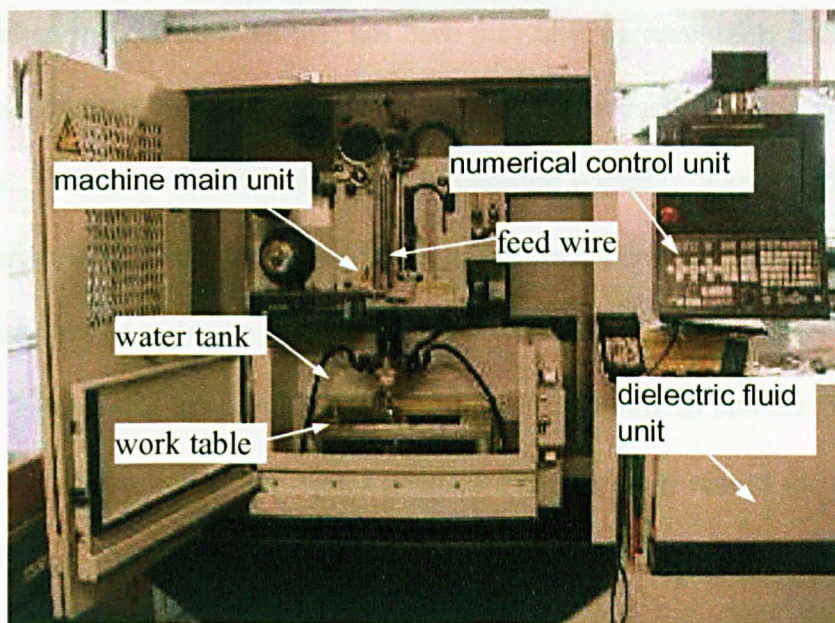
Overview of ROBOCUT CNC wire electric discharge machine
